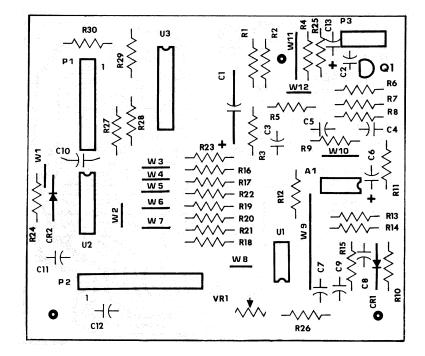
Infrared Remote Receiver PCB Assembly (850 Models Only)
